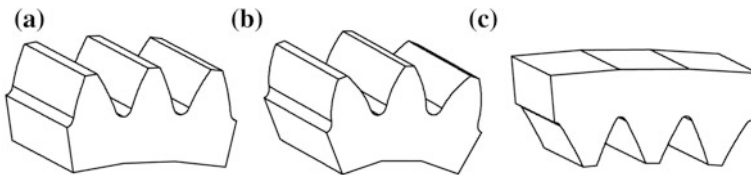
The designed bodies for: a the sun gear, b the planet gear, and c the ring gear
